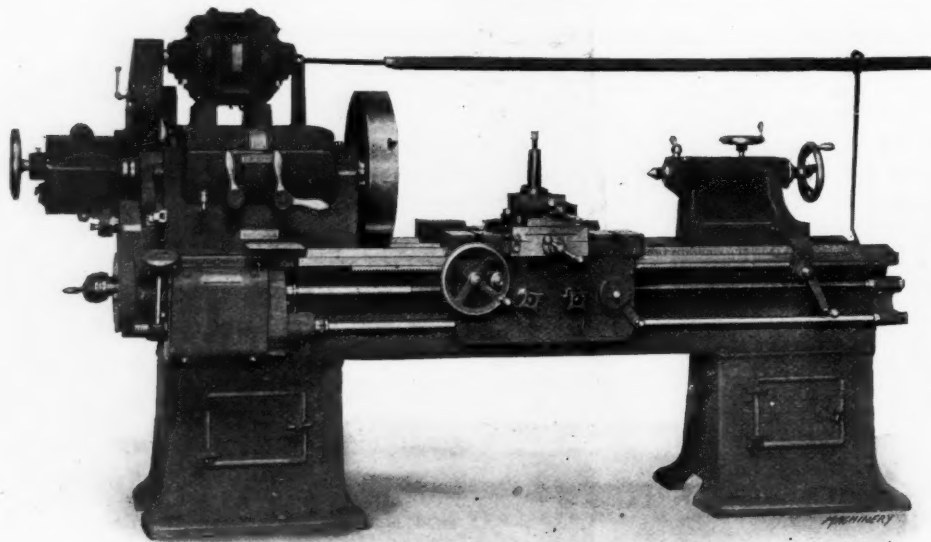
Whitcomb-Blaisdell Geared Head Lathe with Single Pulley Drive
